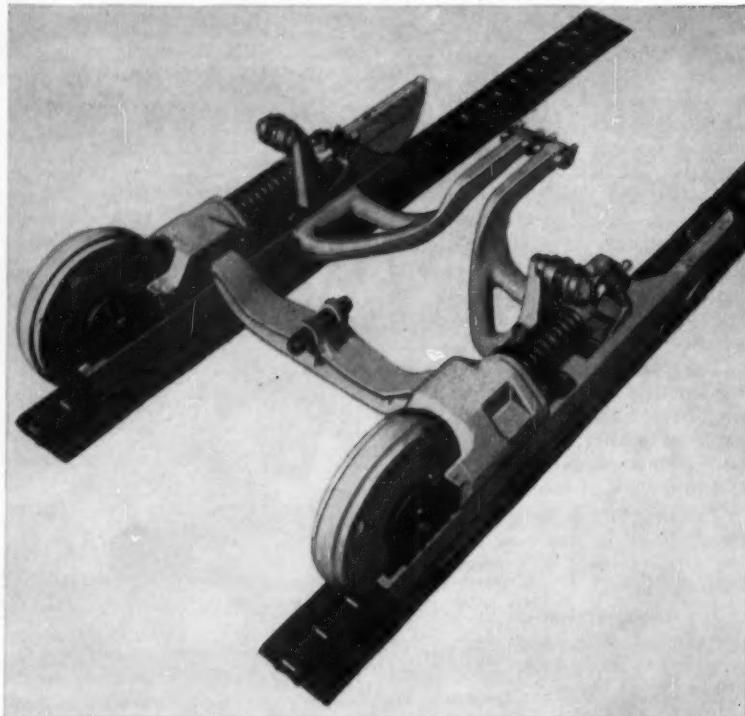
Track assembly showing pivoted equalizer bar and diagonal braces.
